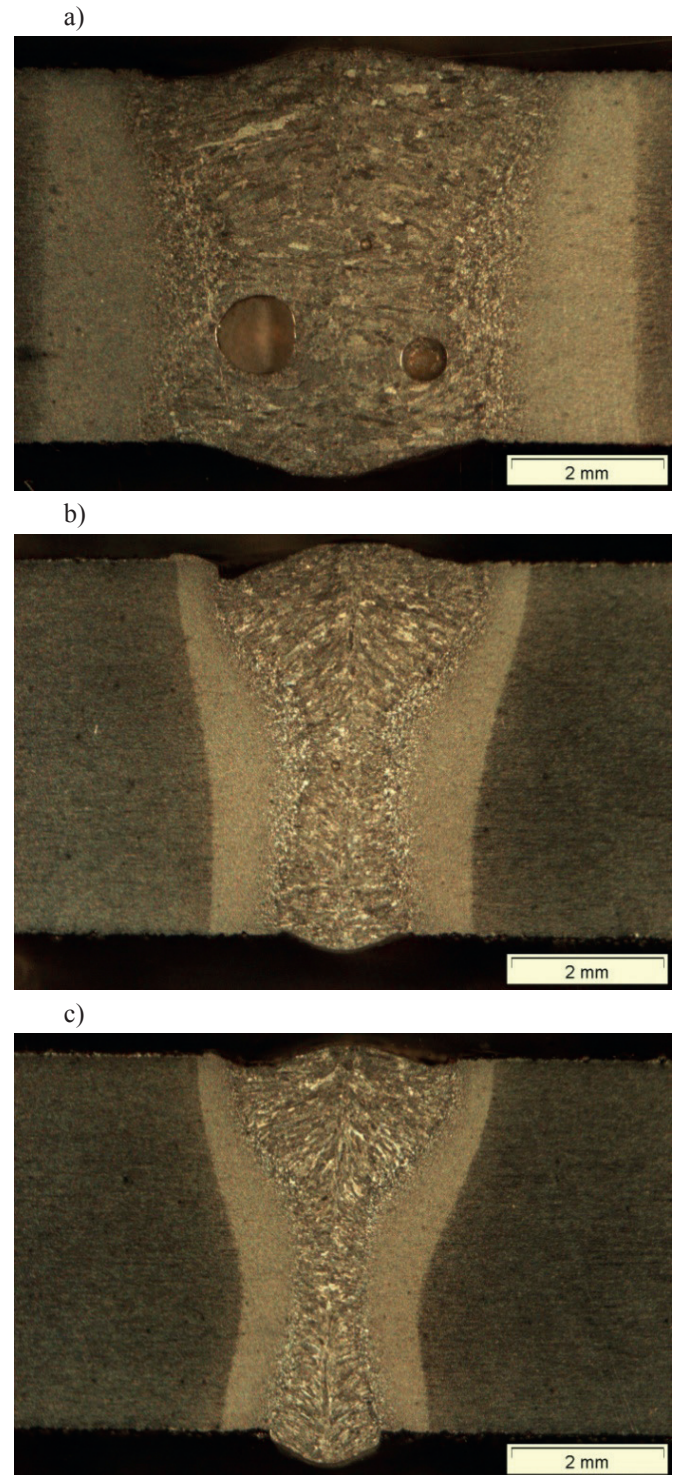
Macrostructure on cross section of the bead-on-plate weld produced at constant laser power 3300 W and welding speed: a) 500 mm/min (heat input 396 J/mm), b) 1000 mm/min (heat input 198 J/mm), c) 1250 mm/min (heat input 158,4 J/mm)
